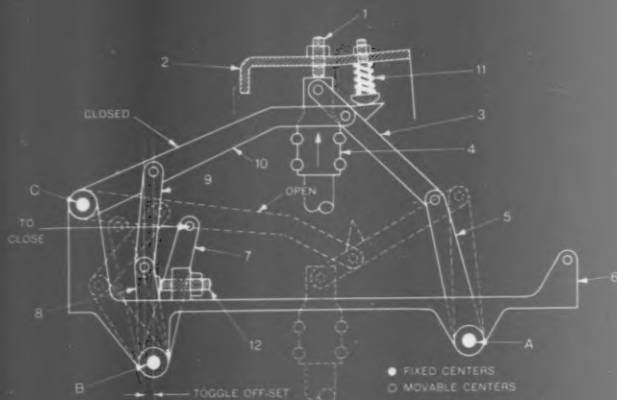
Pole Unit Mechanism for Outdoor Breaker.
